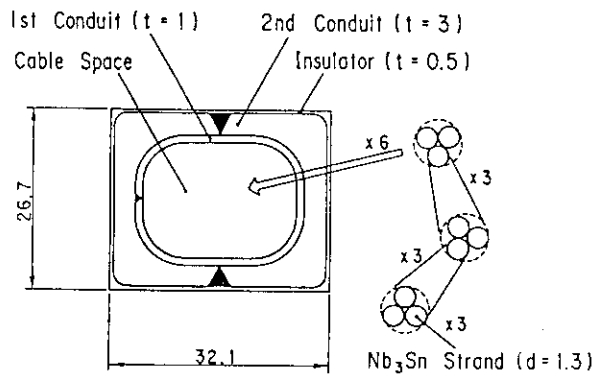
Cross-sectional view of the Preformed Armor type cable-in conduit conductor.
